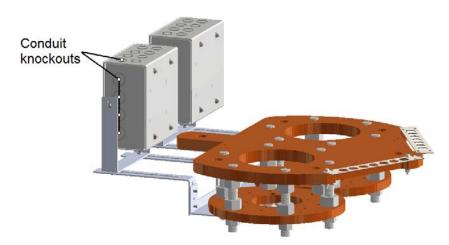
Outlet Boxes on Tandem Mounting Plate
